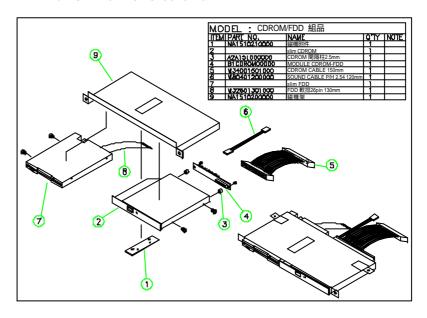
CD-ROM/FDD MODULE ASSEMBLY
